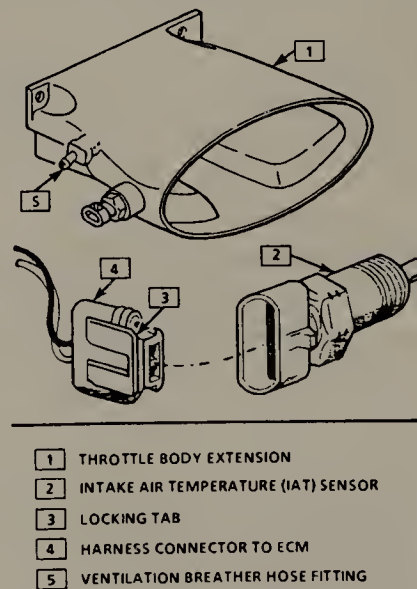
On most vehicles, the IAT sensor is threaded into the throttle body extension
